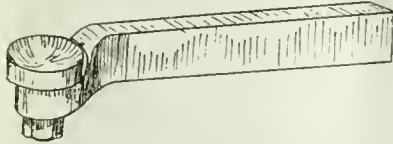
CUP TOOL USED IN LATHE SHOWN IN FIG. 7.
